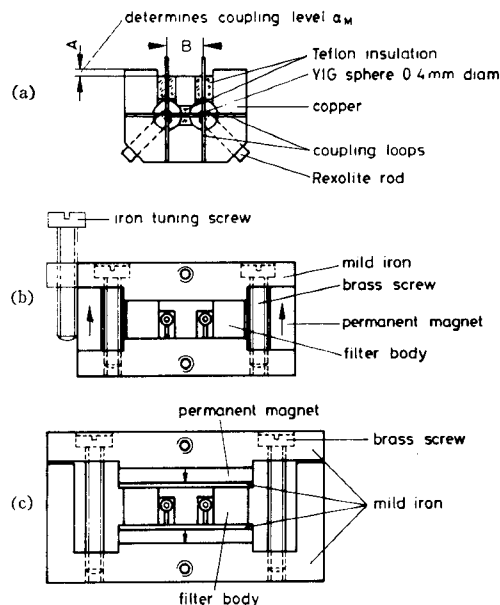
Sketch of the compact YIG bandpass filter. (a) Filter body, (b) Assembled filter component indicating arrangement for magnetic shunt tuning. (c) Magnet system offering shielding against external fields.
